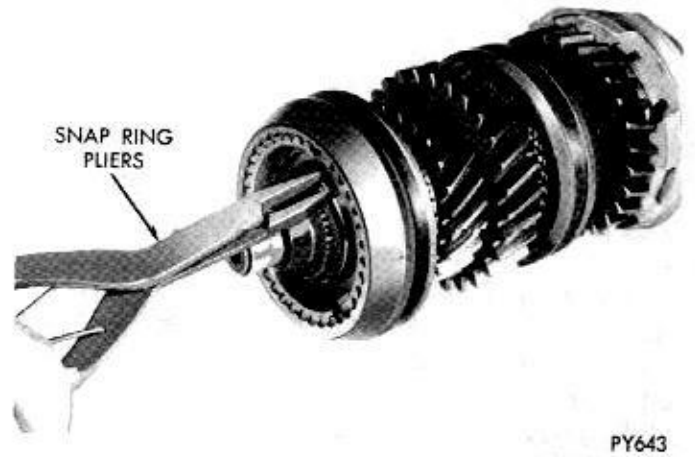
Snap Ring—2nd-3rd Synchronizer Clutch Gear to Mainshaft—Removal or Installation
